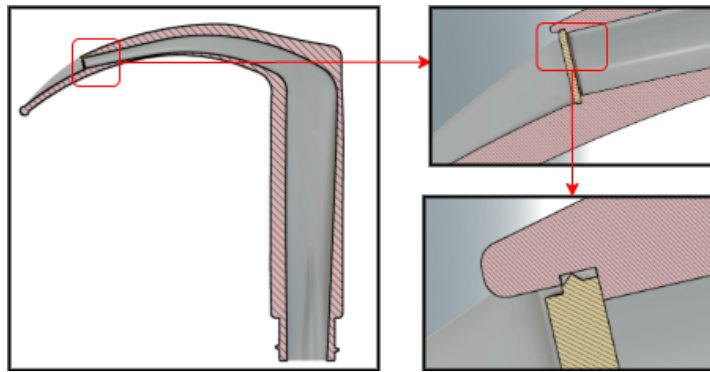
A design change of the VL to optimise the lens opening for sonic welding. Created with Autodesk Fusion 360 [32].
